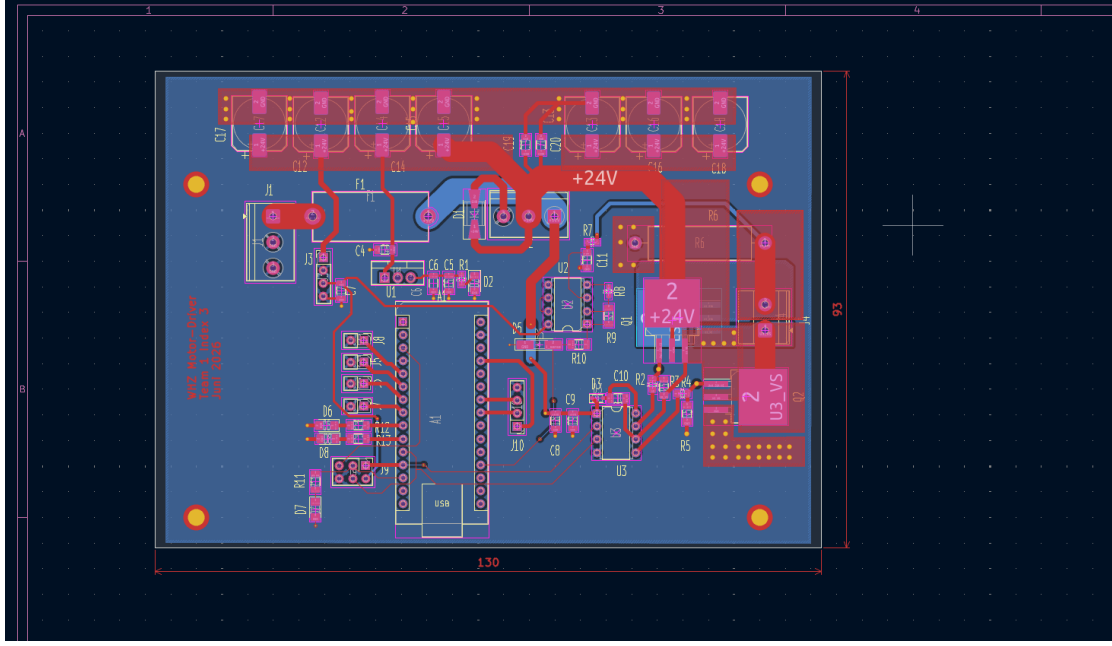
PCB layout of the DC motor driver showing the arrangement of the power stage, input capacitors and control electronics.
